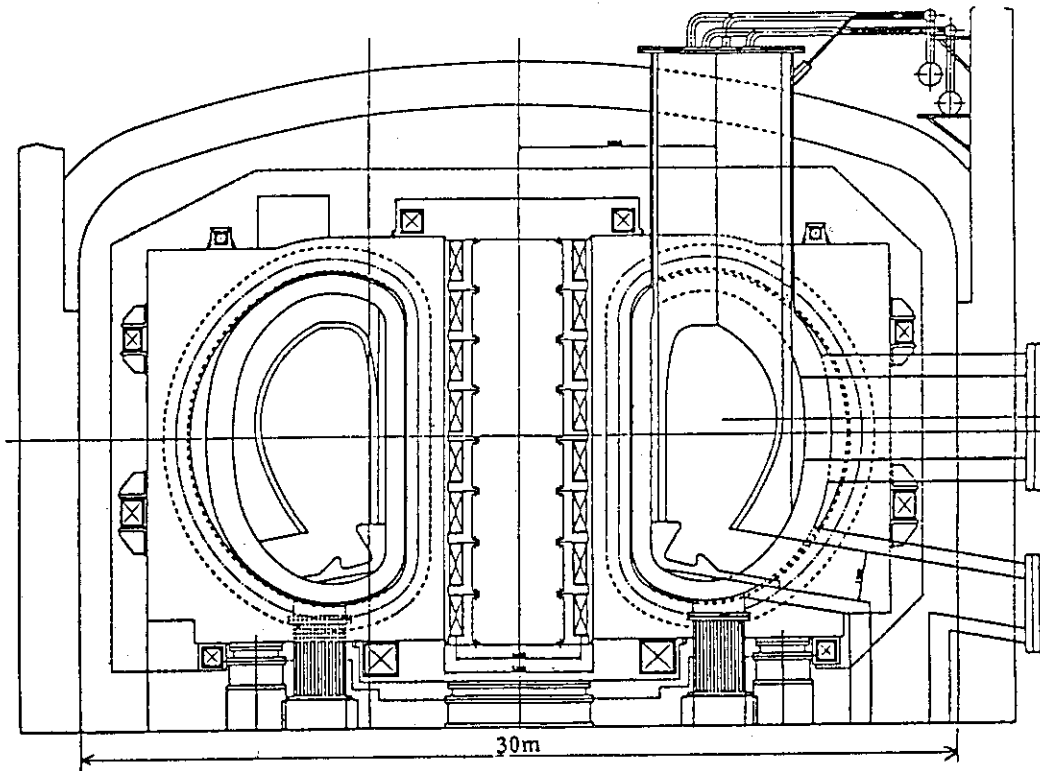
Side view of the SSTR tokamak machine.
